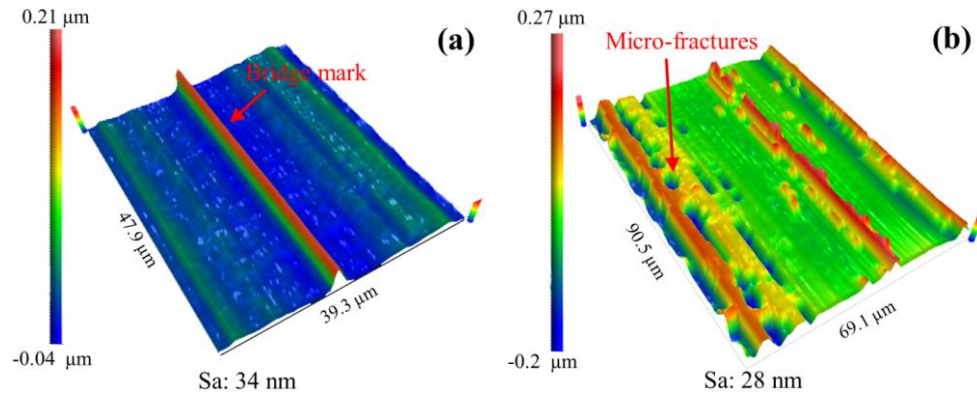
The damage of the finished surface caused by tool wear for (a) sculpturing and (b) UPFC.
